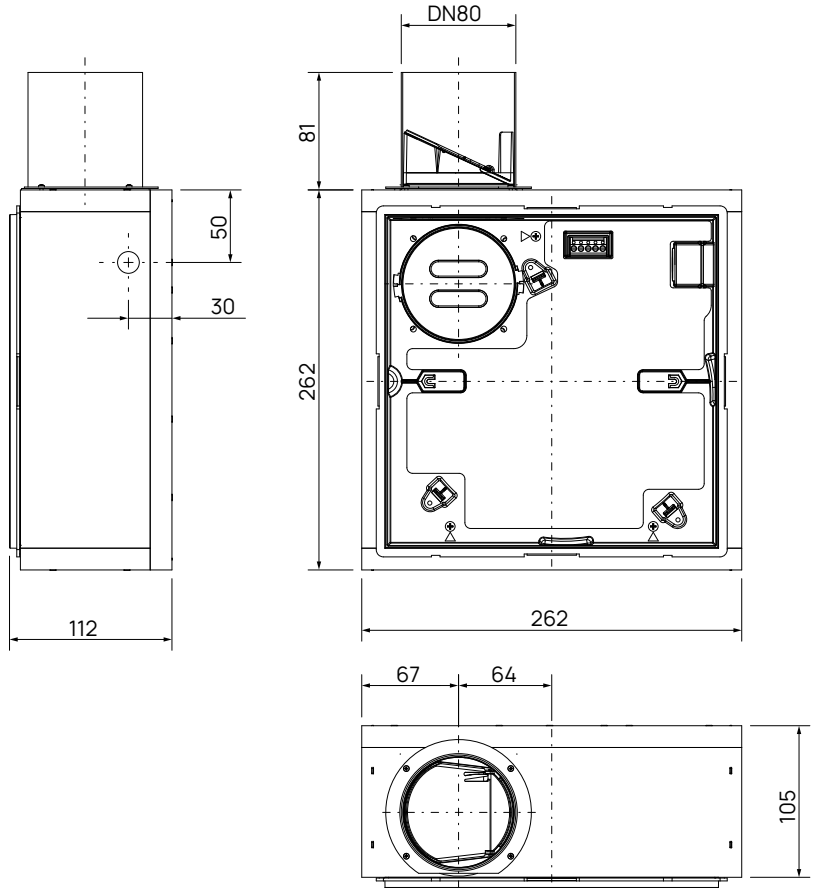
Dimensioned drawing – Taris extractor fan fire protection housing (BSS)
